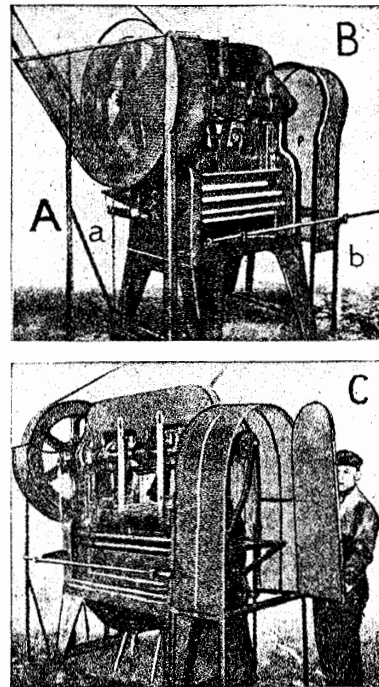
Two Views of Perforated Metal Guards over Belt and Moving Machinery
